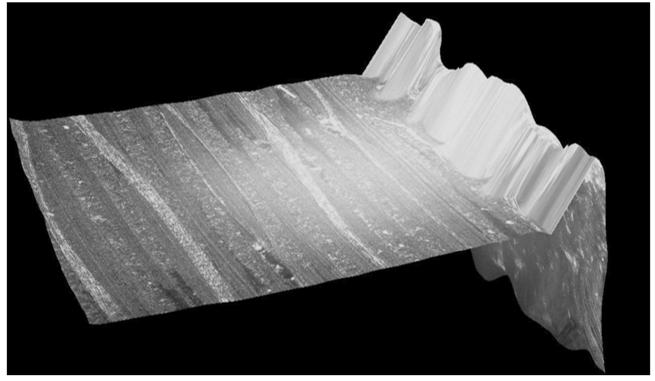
Example of a 3D view of a machined surface profile (for milling conducted using a 3-tooth end mill with PCD inserts,  $v_c = 120 \text{ m.min}^{-1}$ ;  $f_z = 0.08 \text{ mm.tooth}^{-1}$ )
